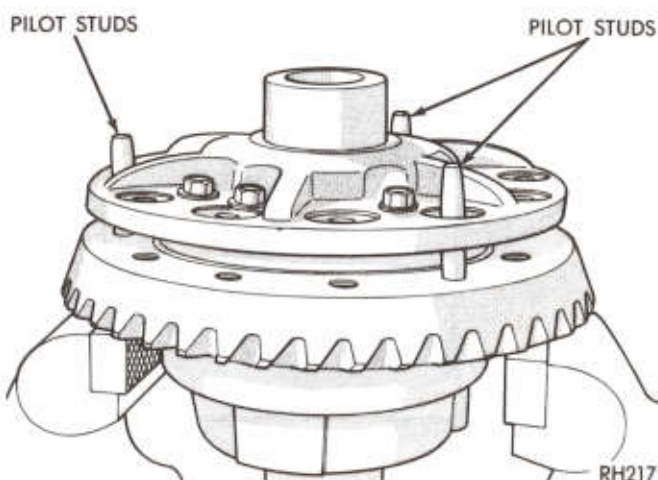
Using Pilot Studs to Locate Case to Heated Ring Gear
